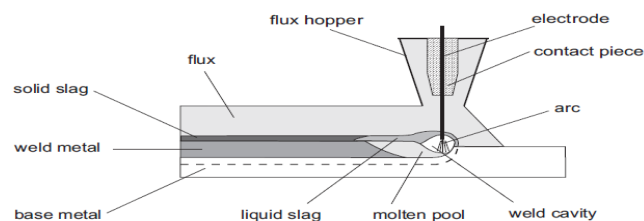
Submerged Arc Welding [2]
